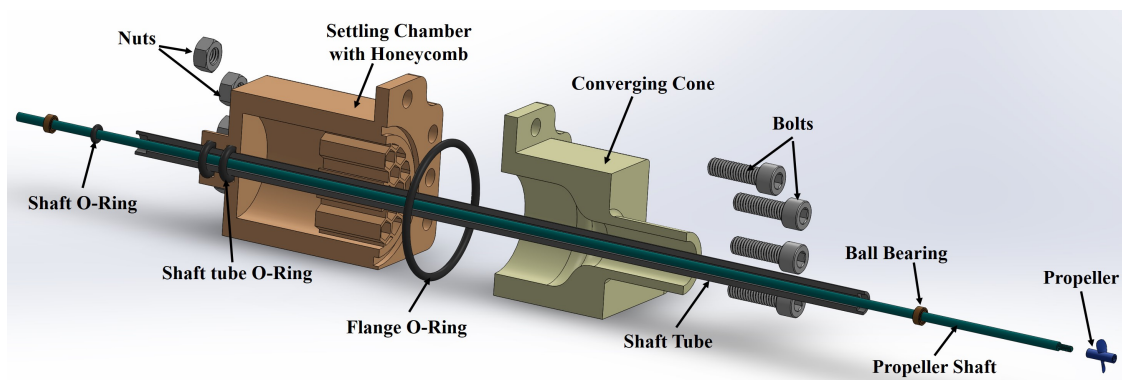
Longitudinal cross section of the exploded view of the Settling chamber-Convergence cone Propeller shaft tube assembly
